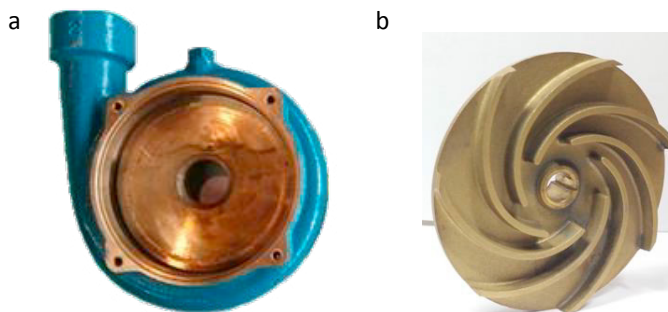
Semi-open impeller pump: (a) volute; (b) impeller
